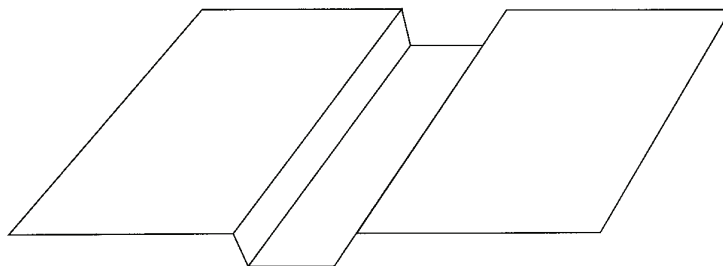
Forming a hat section to give structural reinforcement to a thermoformed part.
